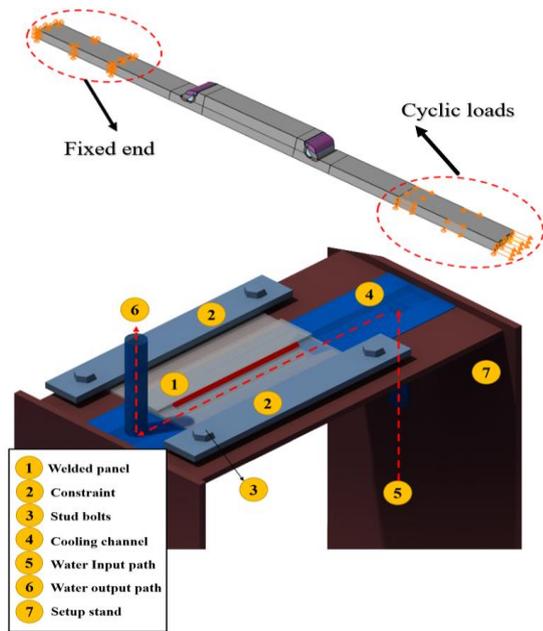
Schematic of the in-service welding test rig and test sample loading
